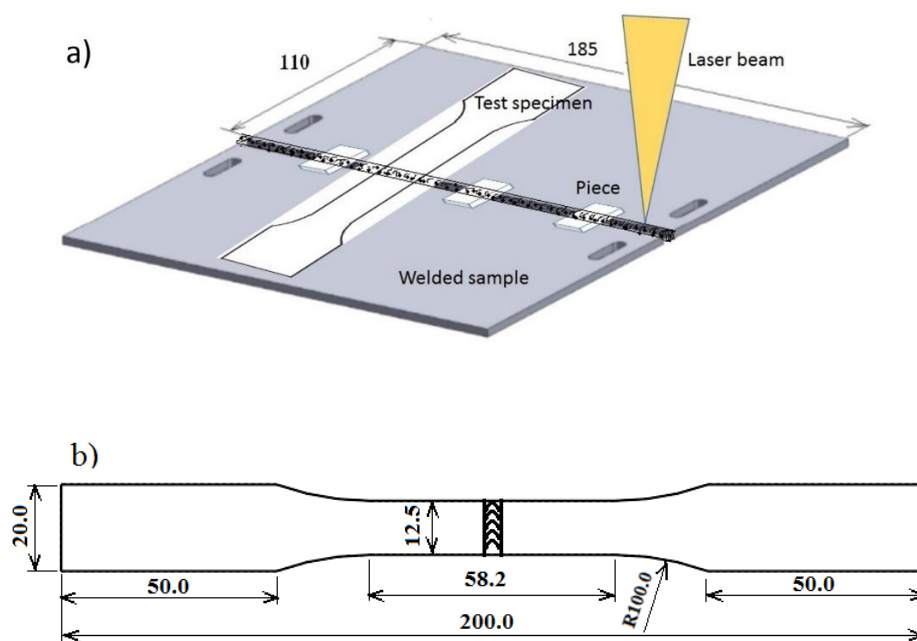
a) Sketch of plates for the welding and location of specimens, b) dimensions of specimens used in fatigue tests.
